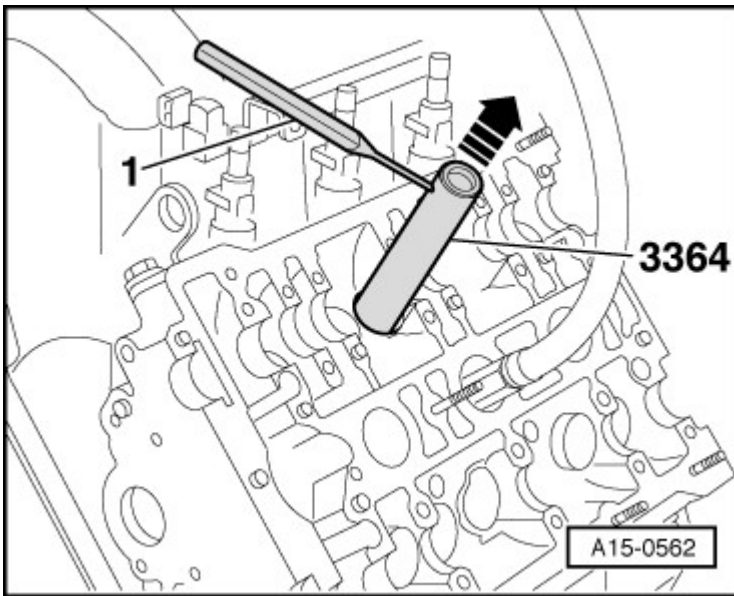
Positioning Lower Part Of 3364 Valve Stem Removal Tool At Valve Stem Oil Seal
